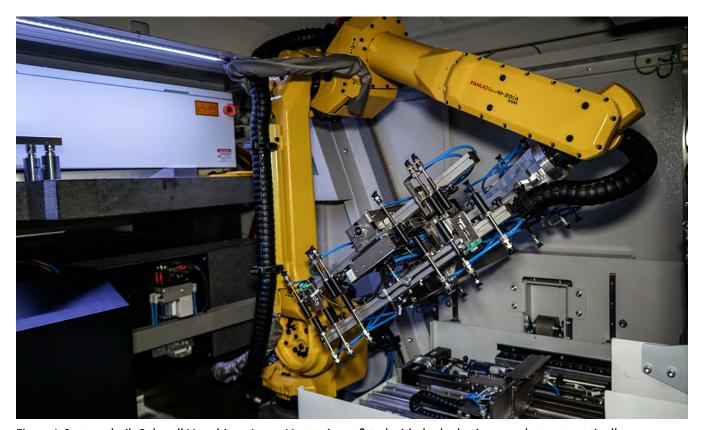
Custom-built Schmoll Maschinen Laser Master is outfitted with dual robotic arms that automatically flip panels over.
